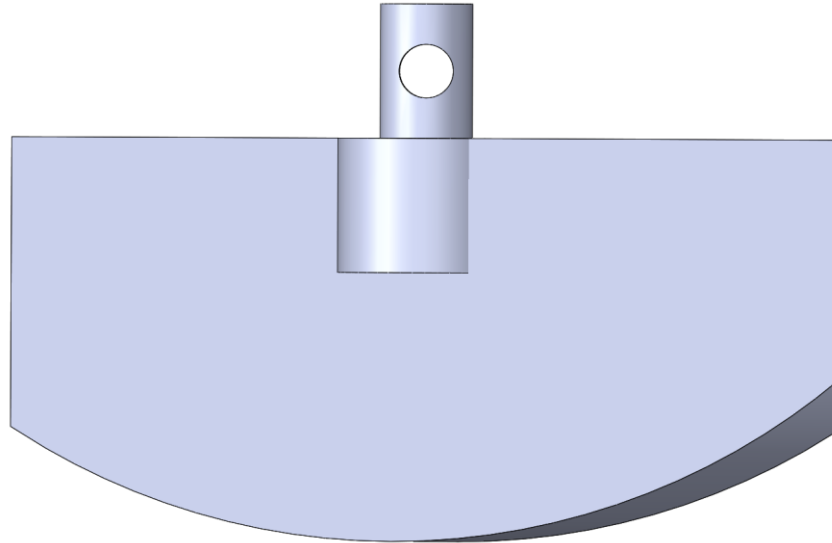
45 degree side paddle, the bottom edge made to follow the cylinder perfectly.
